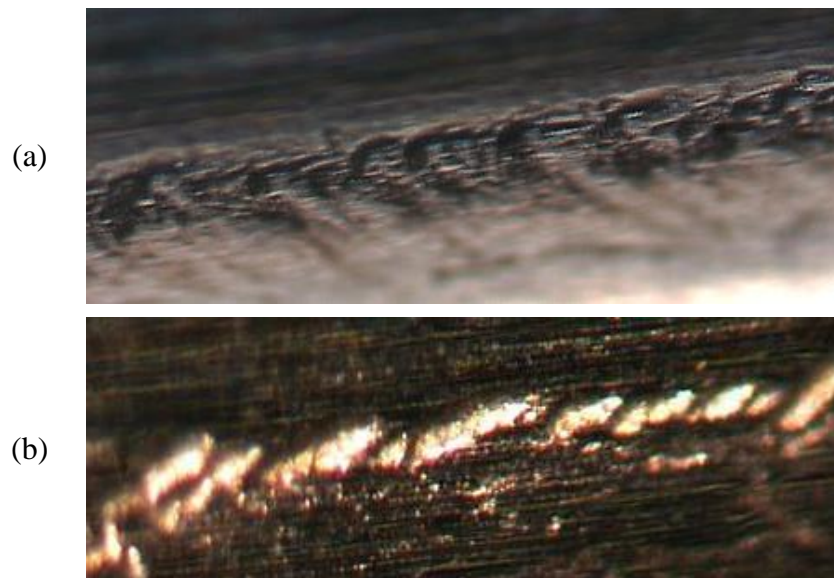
Pickup removed on tool surfaces showing damage by material torn from the tool; (a) at s-bend and (b) at QT-bend
